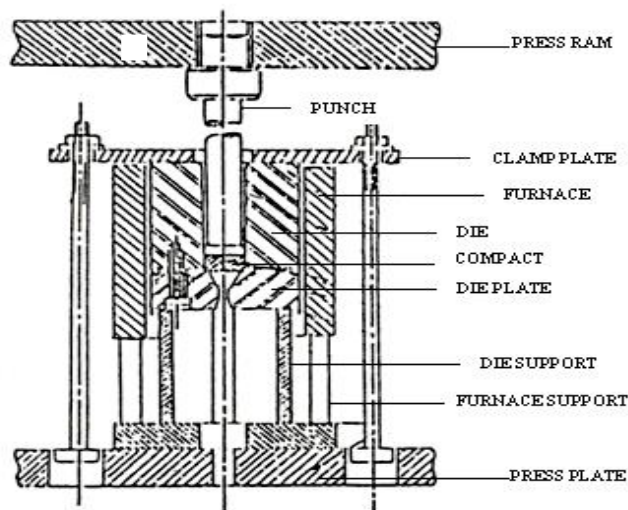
(b) Complete Extrusion Assembly Along with the in-situ Heating Arrangement
